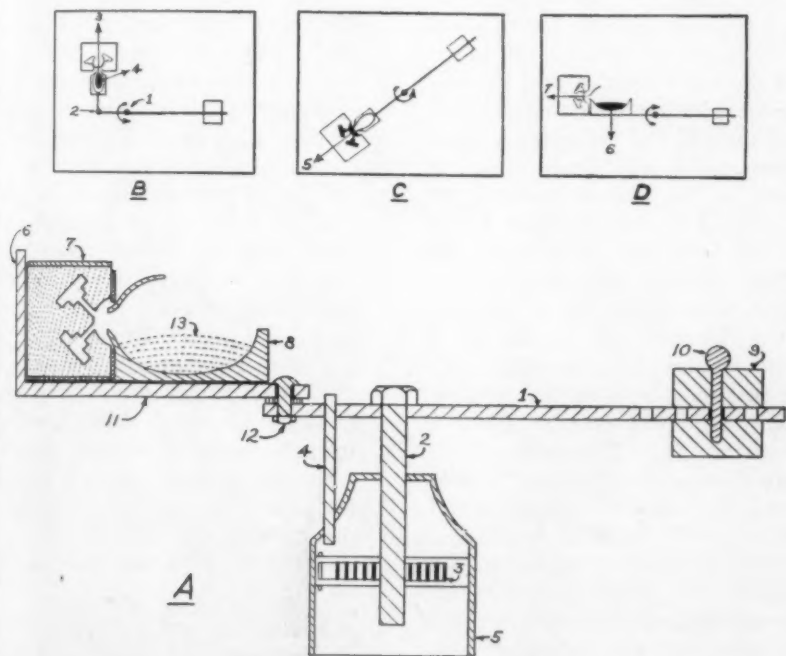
A—TYPICAL DENTAL TYPE CENTRIFUGAL CASTING MACHINE. 1—ARM OR BEAM. 2—VERTICAL AXIS SHAFT. 3—MOTIVATING COILED SPRING. 4—COCKING PIN. 5—BASE. 6—BACKSTOP. 7—MOLD. 8—CRUCIBLE OR MELTING FURNACE. 9—COUNTERBALANCE. 10—COUNTERBALANCE PIN. 11—ARM SECTION. 12—PIVOT. B AND C—DRAWINGS ILLUSTRATING FORCES ACTING ON MOLTEN METAL IN PIVOTED TYPE CENTRIFUGAL CASTING MACHINE. 1—VERTICAL AXIS. 2—PIVOT POINT. 3—POINT OF PRINCIPAL FORCE OF INERTIA ON METAL AT INSTANT OF RELEASE. 4—ADDED FORCE OF INERTIA AFTER ARM HAS PIVOTED ABOUT (2). 5—DIRECTION OF CENTRIFUGAL FORCE AFTER MOLD ASSEMBLY HAS MADE A PORTION OF TURN. D—SOLID-ARM TYPE CENTRIFUGAL CASTING MACHINE SPINNING IN VERTICAL PLANE ABOUT HORIZONTAL AXIS. 6—DIRECTION OF INERTIA FORCE. 7—DIRECTION OF CENTRIFUGAL FORCE.
